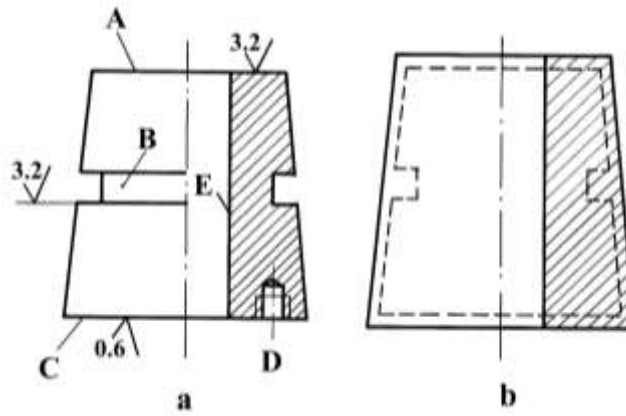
Drawing of a part to be cast (a) and casting (b)
